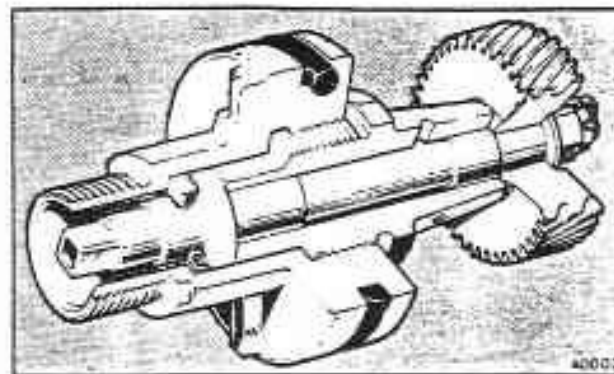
Speedometer drive Cars produced prior to 1984
